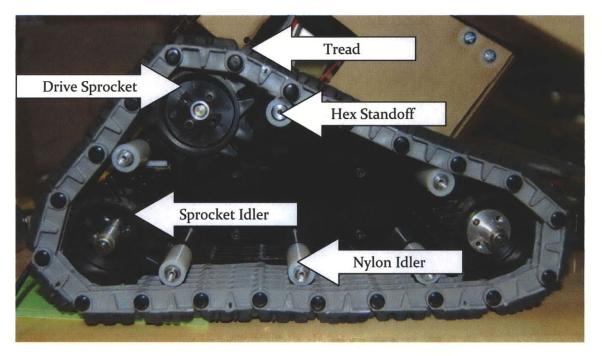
Side view of tread drive system internals, showing individual components (note: front plate is removed in order to see internals).
